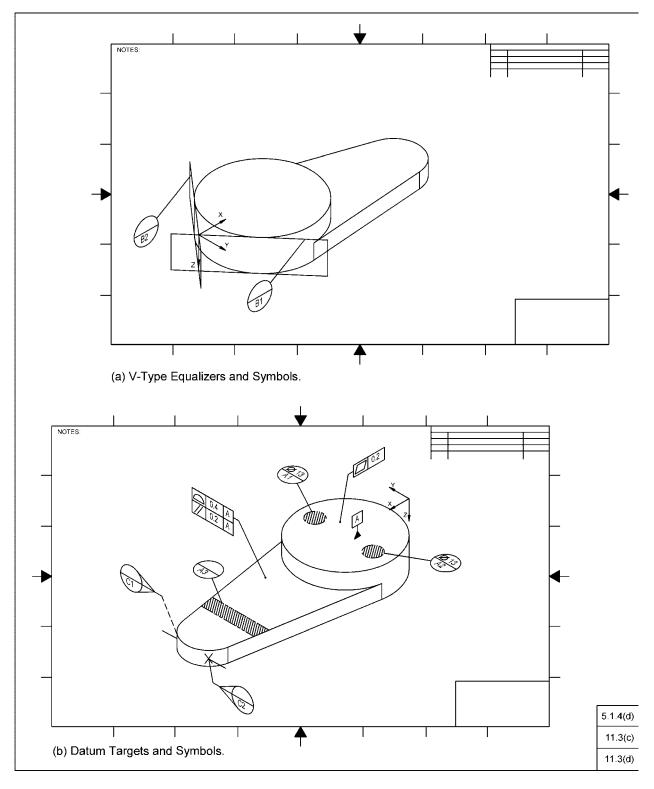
Datum Targets and Symbols in an Axonometric View
